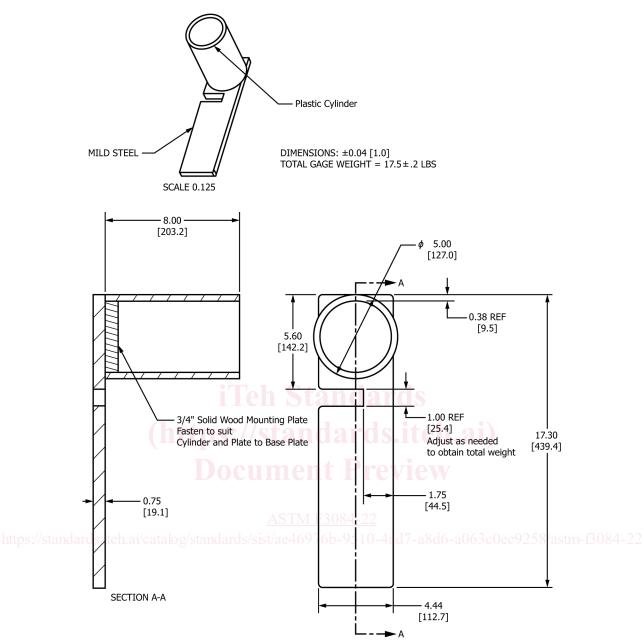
Forward Stability Test Fixture for Infant/Toddler Rockers
